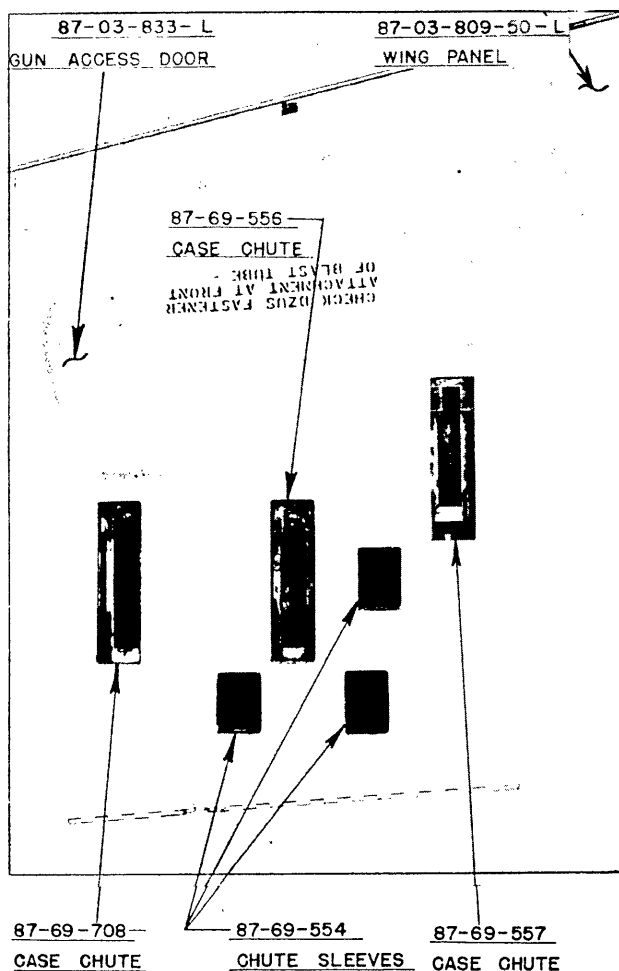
Wing Guns - Bottom View - Guns Access Door Open
